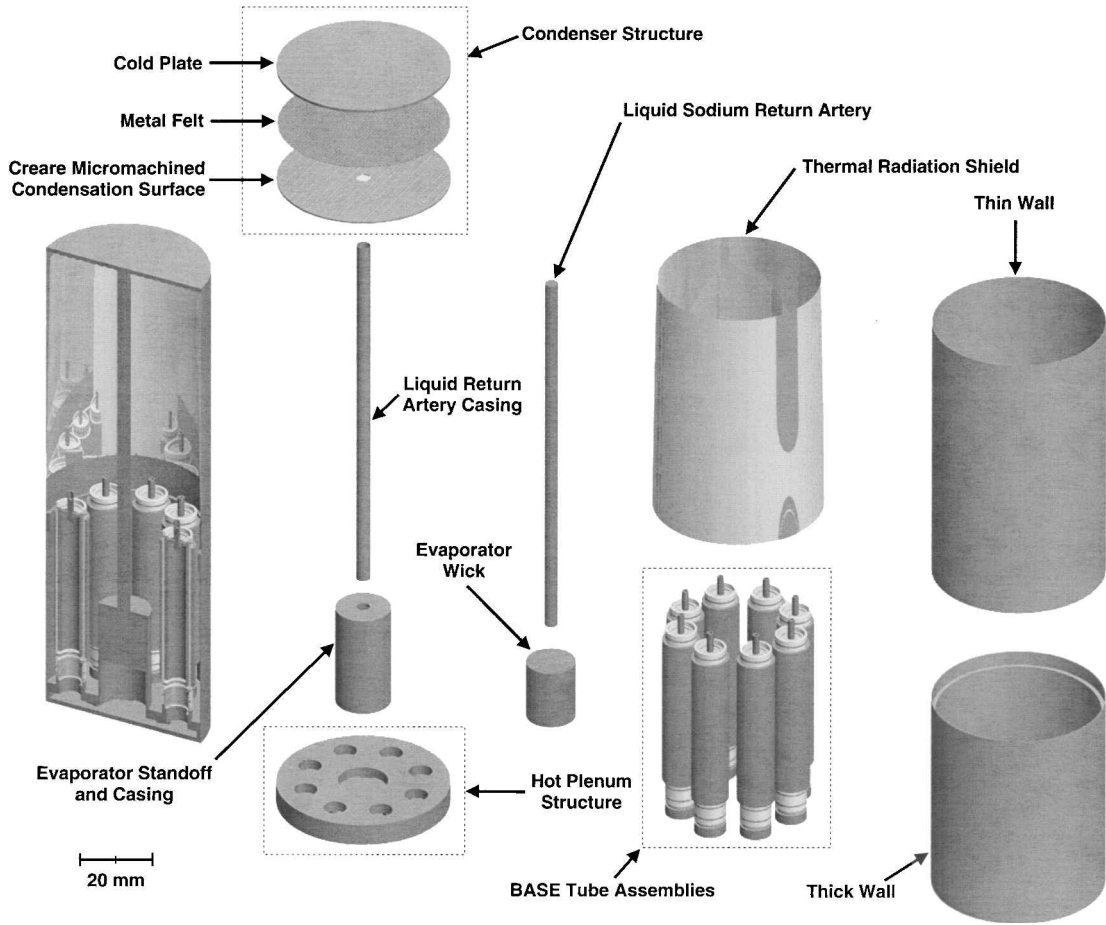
Exploded trimetric view of a Nb-1Zr/C-103 AMTEC cell.<sup>7</sup>
